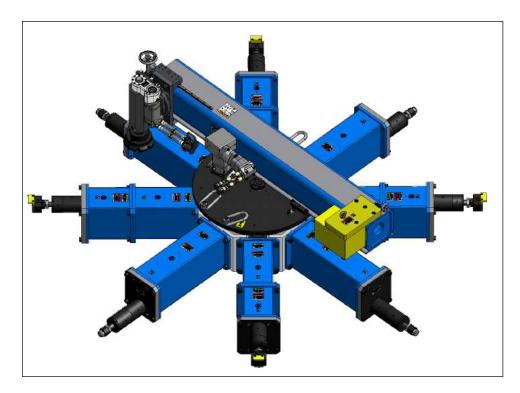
ID MOUNT WITH SWIVEL HEAD COUNTERWEIGHT ADAPTER PLATE
